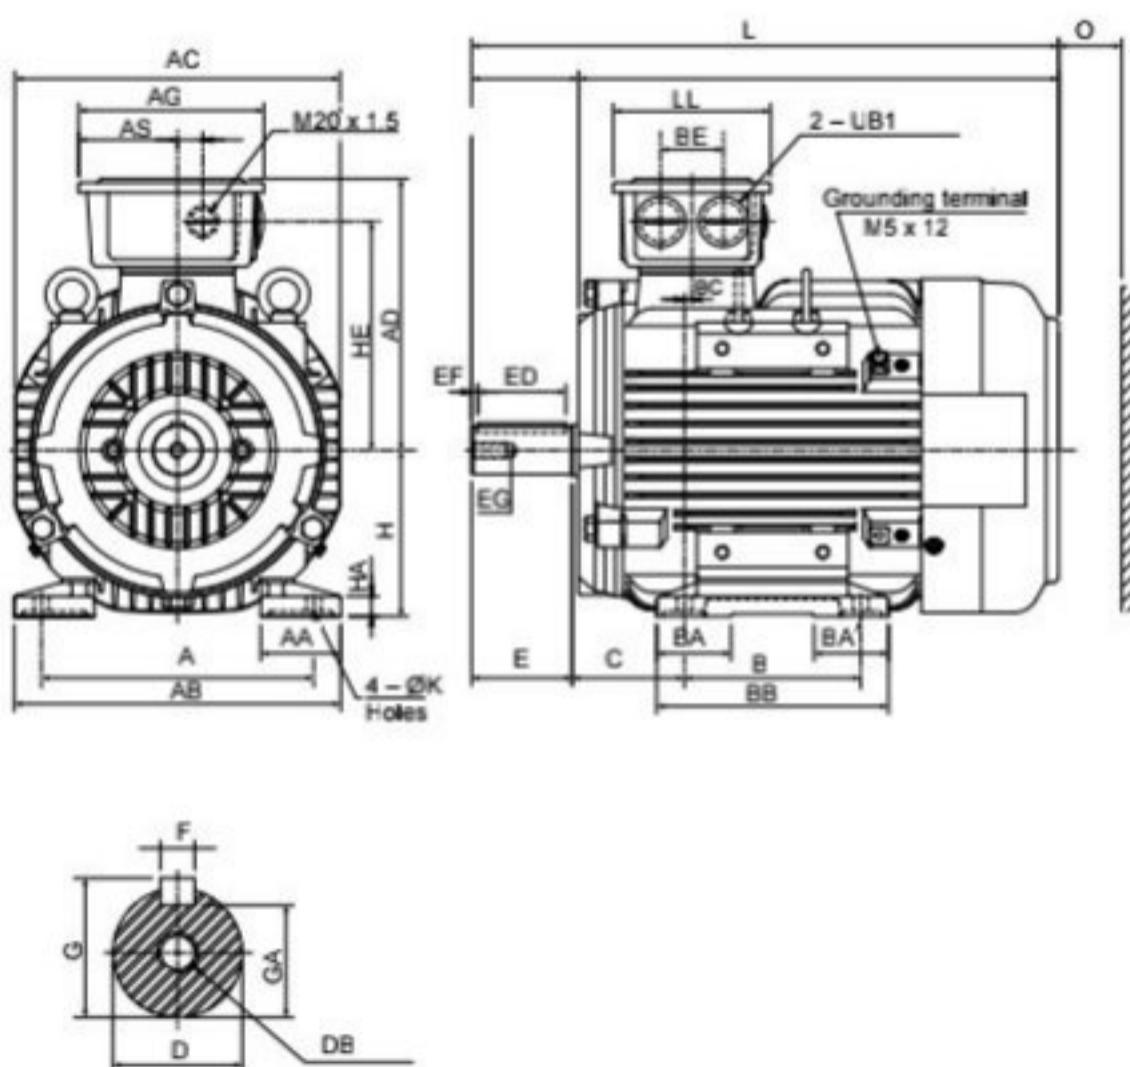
Outline drawing of cast iron design, feet version, mounting B3; frame size 132
